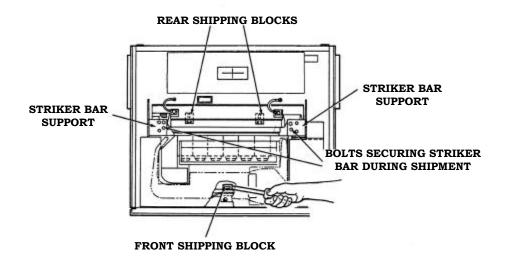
SHIPPING BLOCK LOCATIONS
